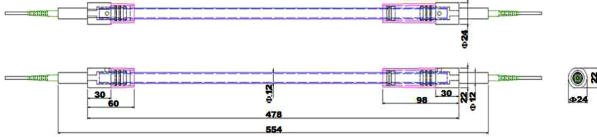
CAD drawing for sensor packaging for smart trestle structure.
